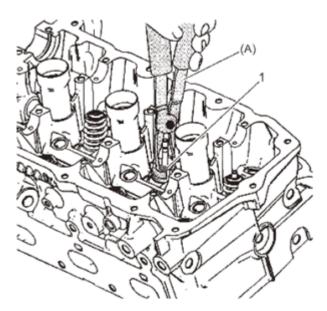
Identifying Cylinder Block Valve Courtesy of SUZUKI OF AMERICA CORP.
